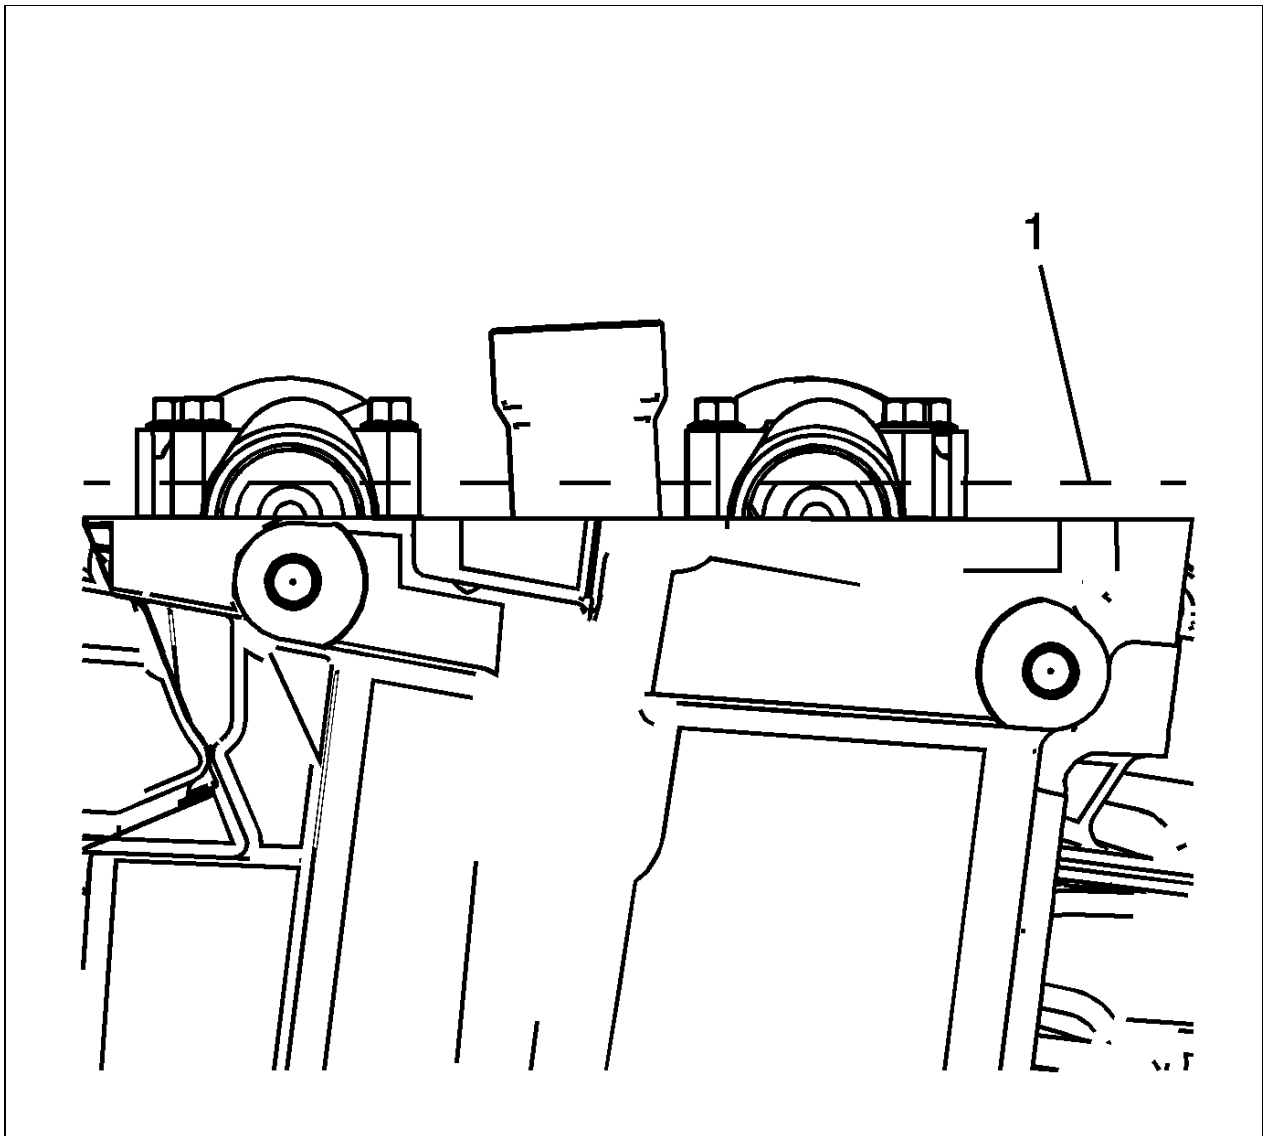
Right Cylinder Head Camshaft Intake & Exhaust Points
